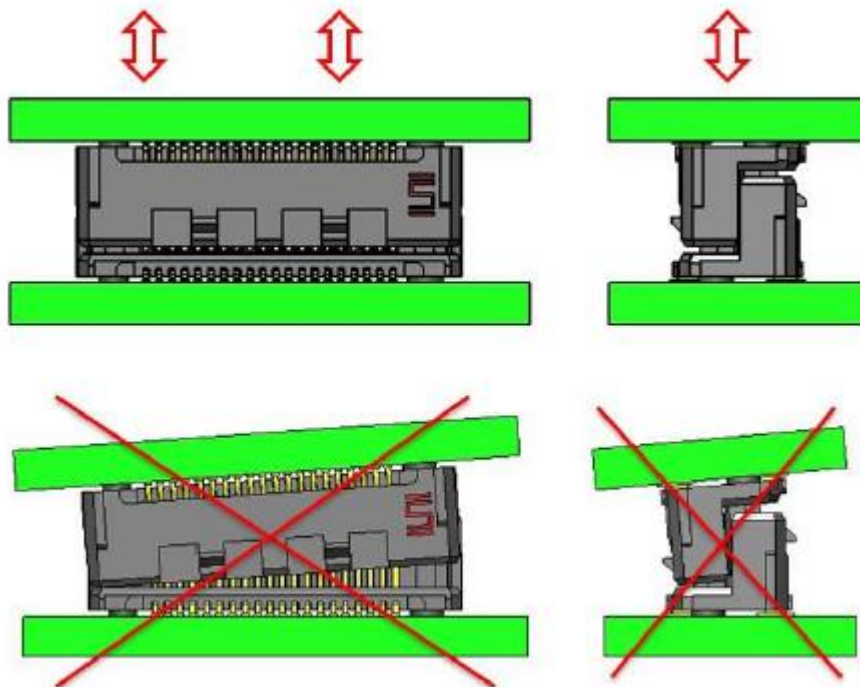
Axial removal vs zippering (picture courtesy of Samtec®)
